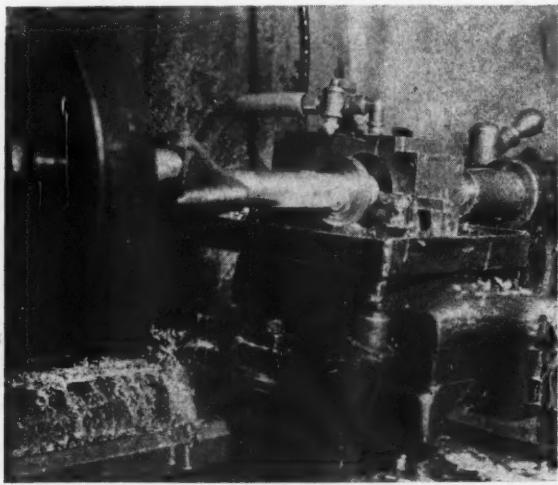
CUTTING JIG on a 16-inch lathe permits cutting a 2-1/16-inch shaft to 1-inch diameter in a single operation. Cutting tool has a counterpart diametrically opposite.
